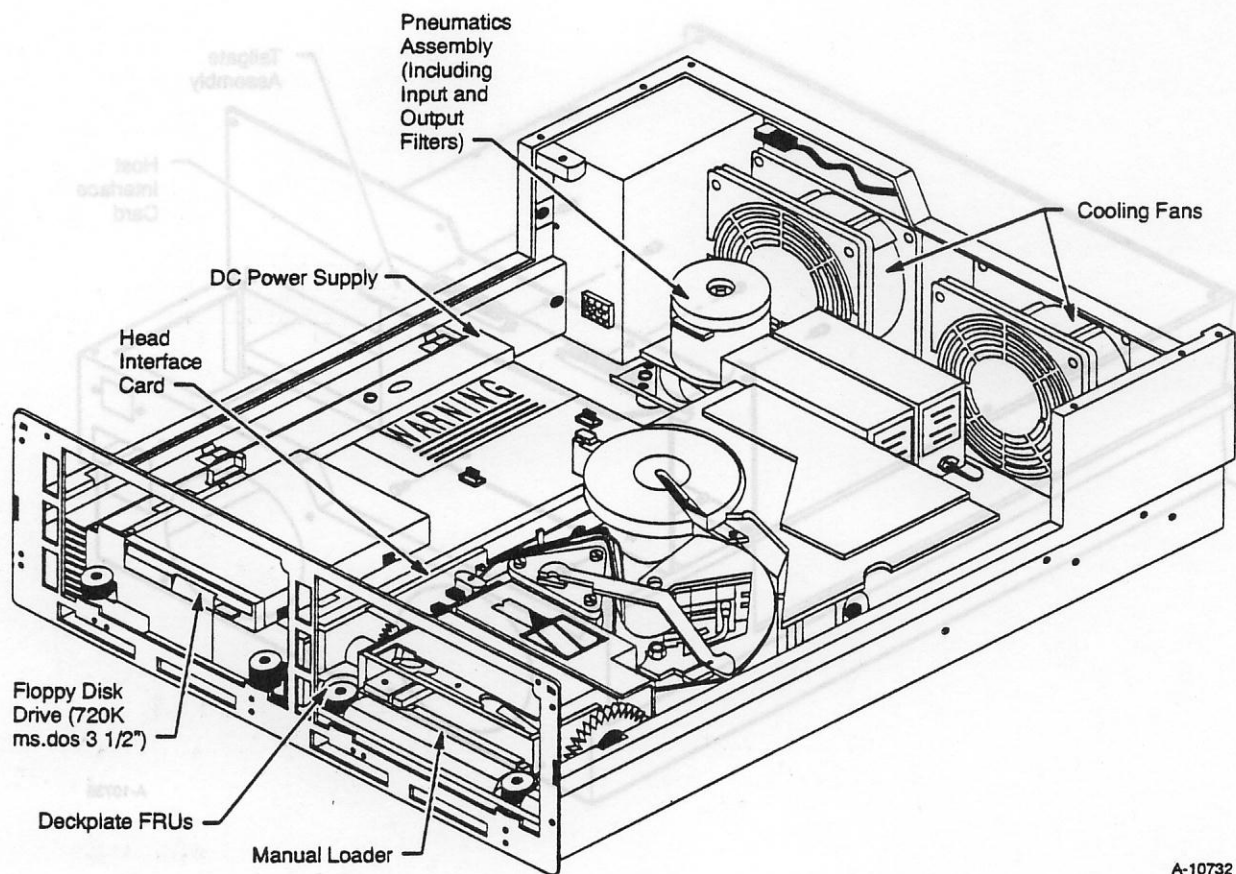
TD-3 Tape Drive Controller Module FRUs (Rear View)
